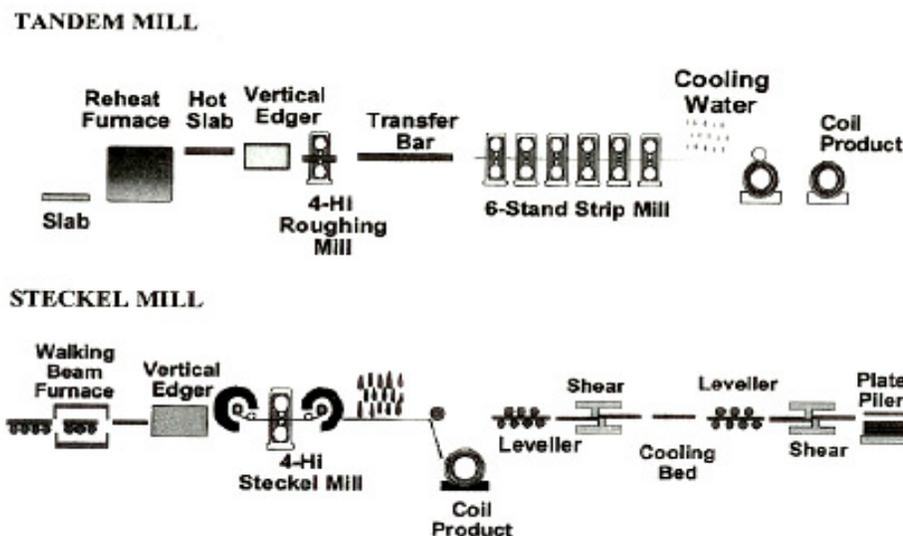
Typical tandem (strip) and Steckel mill layouts
